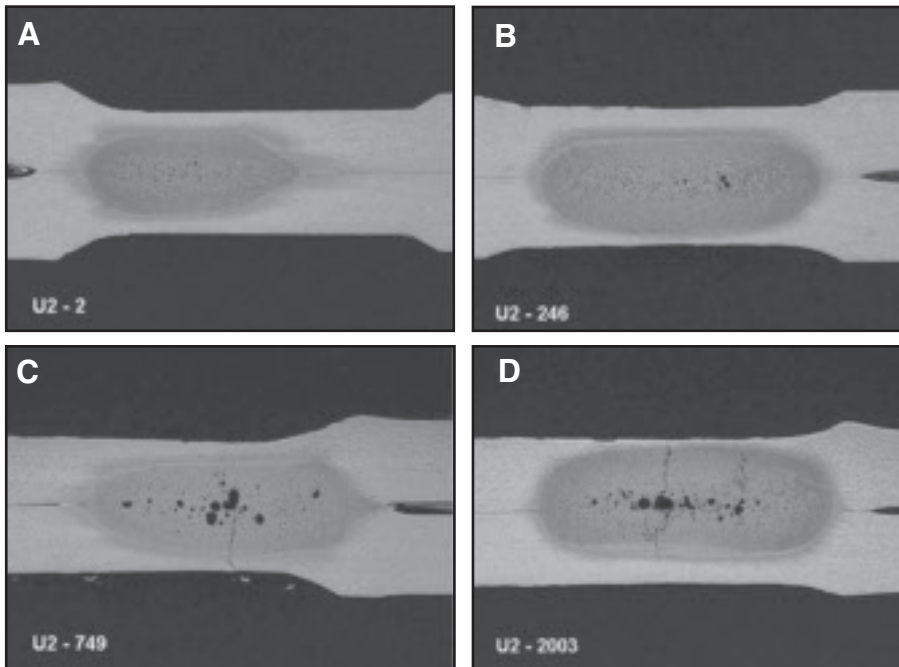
Weld microstructure variations during electrode life testing for 6111. All data are taken from Ref. 24. A — Weld Number 2; B — weld Number 246; C — weld Number 749; D — weld Number 2003.
